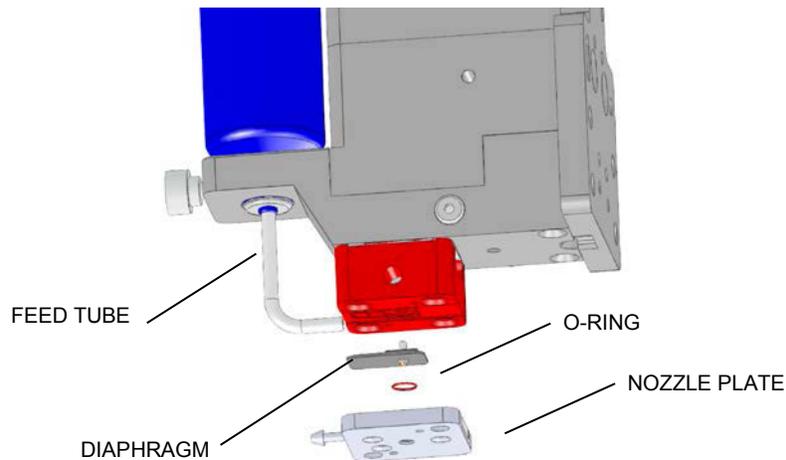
NCM7500 Nozzle Plate, O-ring, Diaphragm, and feed tube
